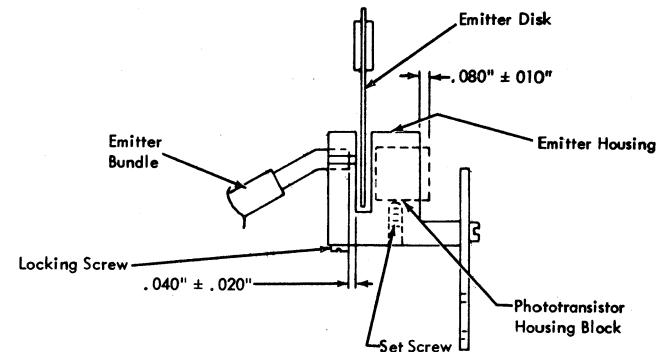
Emitter Bundle and Phototransistor Adjustment
